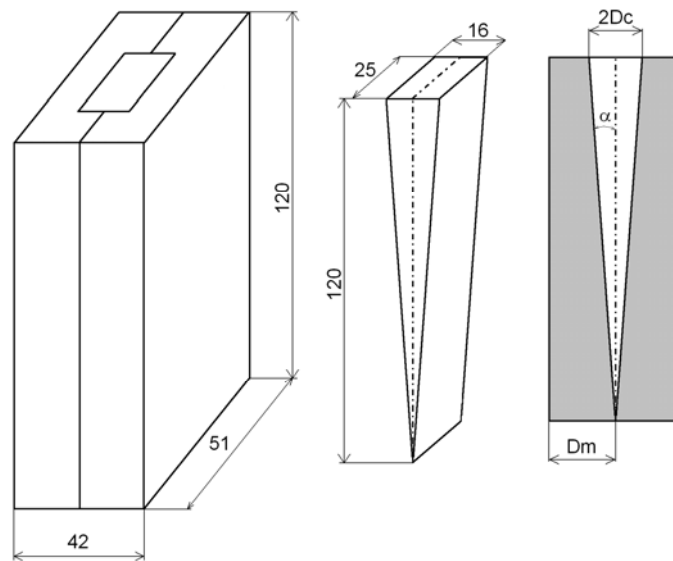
Schematic depiction of the wedge-shape copper mould-casting device used to give a range of cooling rates during solidification (the dimensions are in millimetres); the two halves of the copper mould; the wedge-shape Al alloy casting; vertical cross section through the wedge-shape “mould-casting device”
